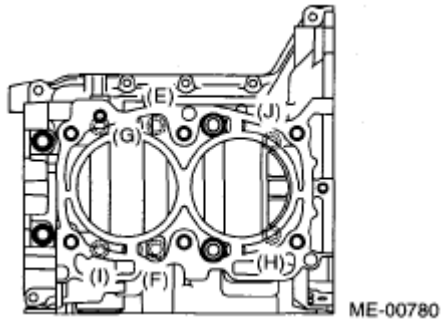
Identifying Cylinder Block Connecting Bolts Tightening Sequence (RH Side)
